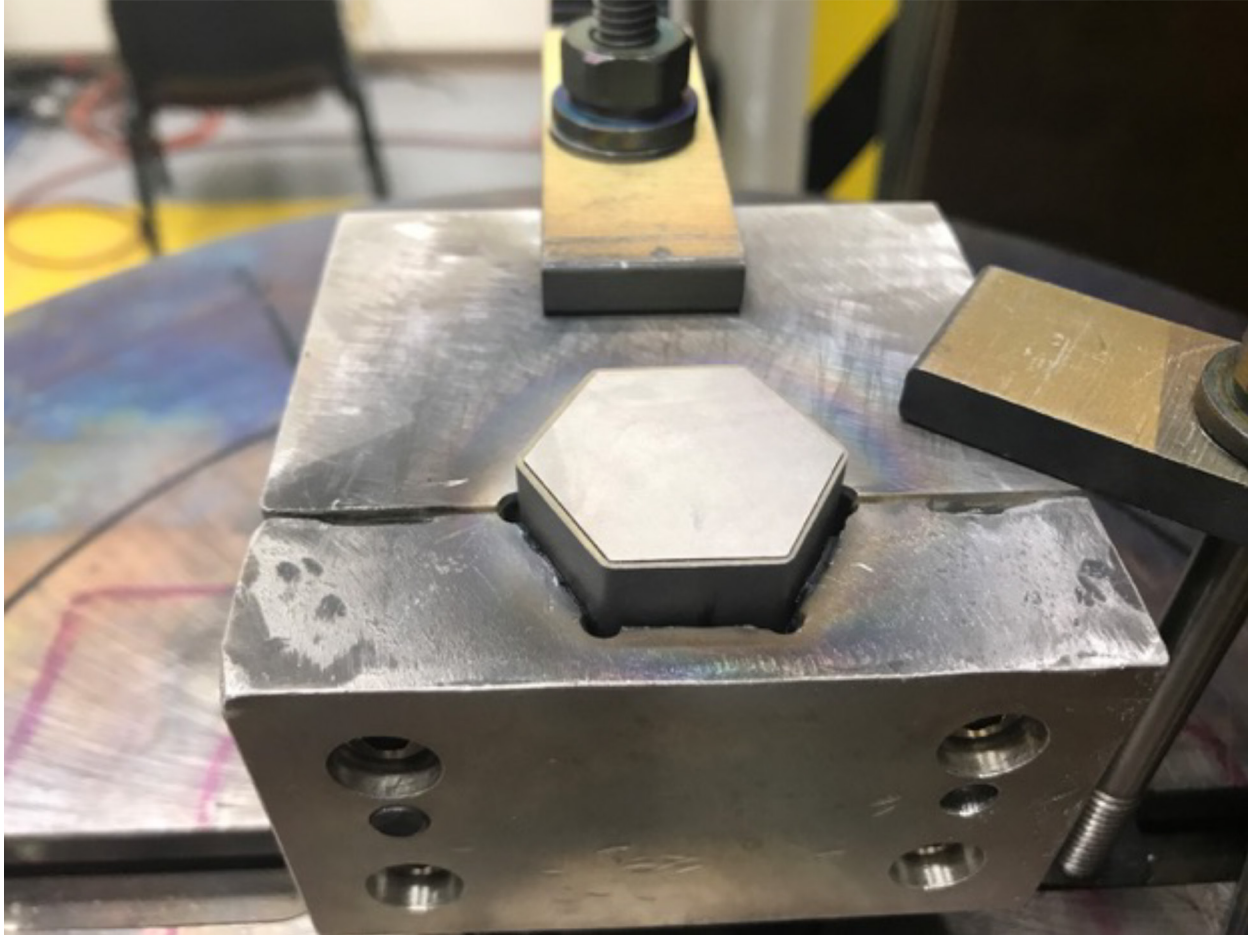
Image of EBW_Hex8 assembled in the EBW fixture prior to welding.
